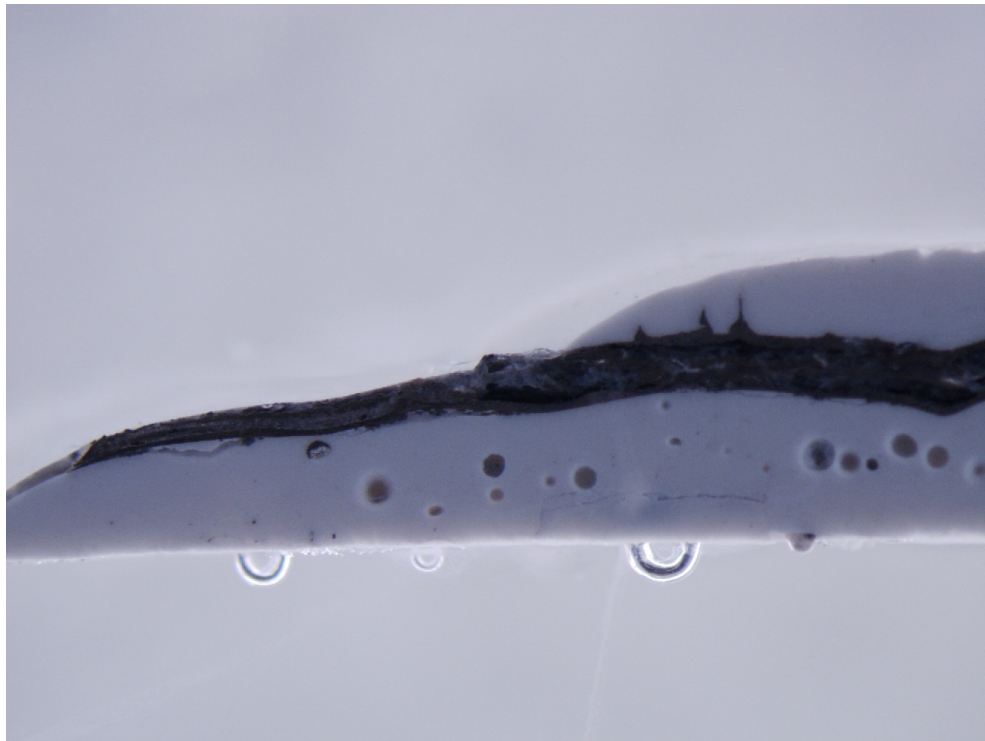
Cross-section showing air pockets in un-vacuumed, sintered sample
